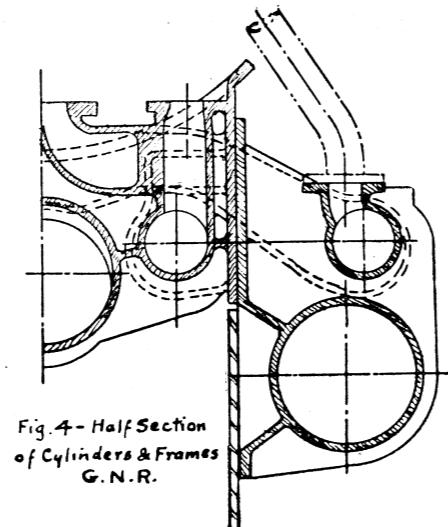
Half Section of Cylinders & Frames G.N.R.
